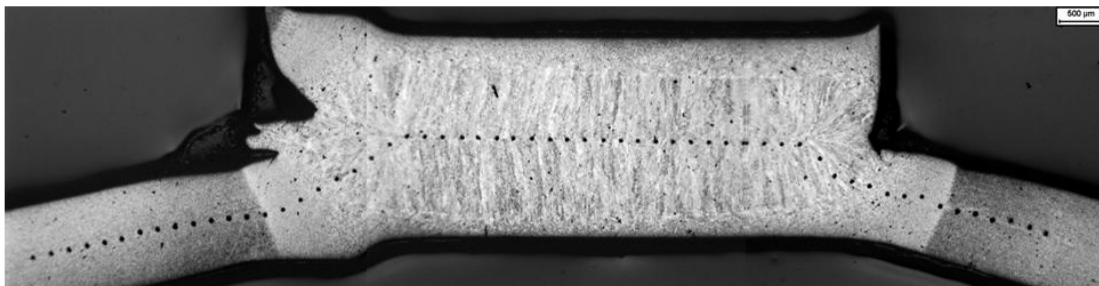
b: Plug failure in tensile tested DP800 resistance spot weld.
